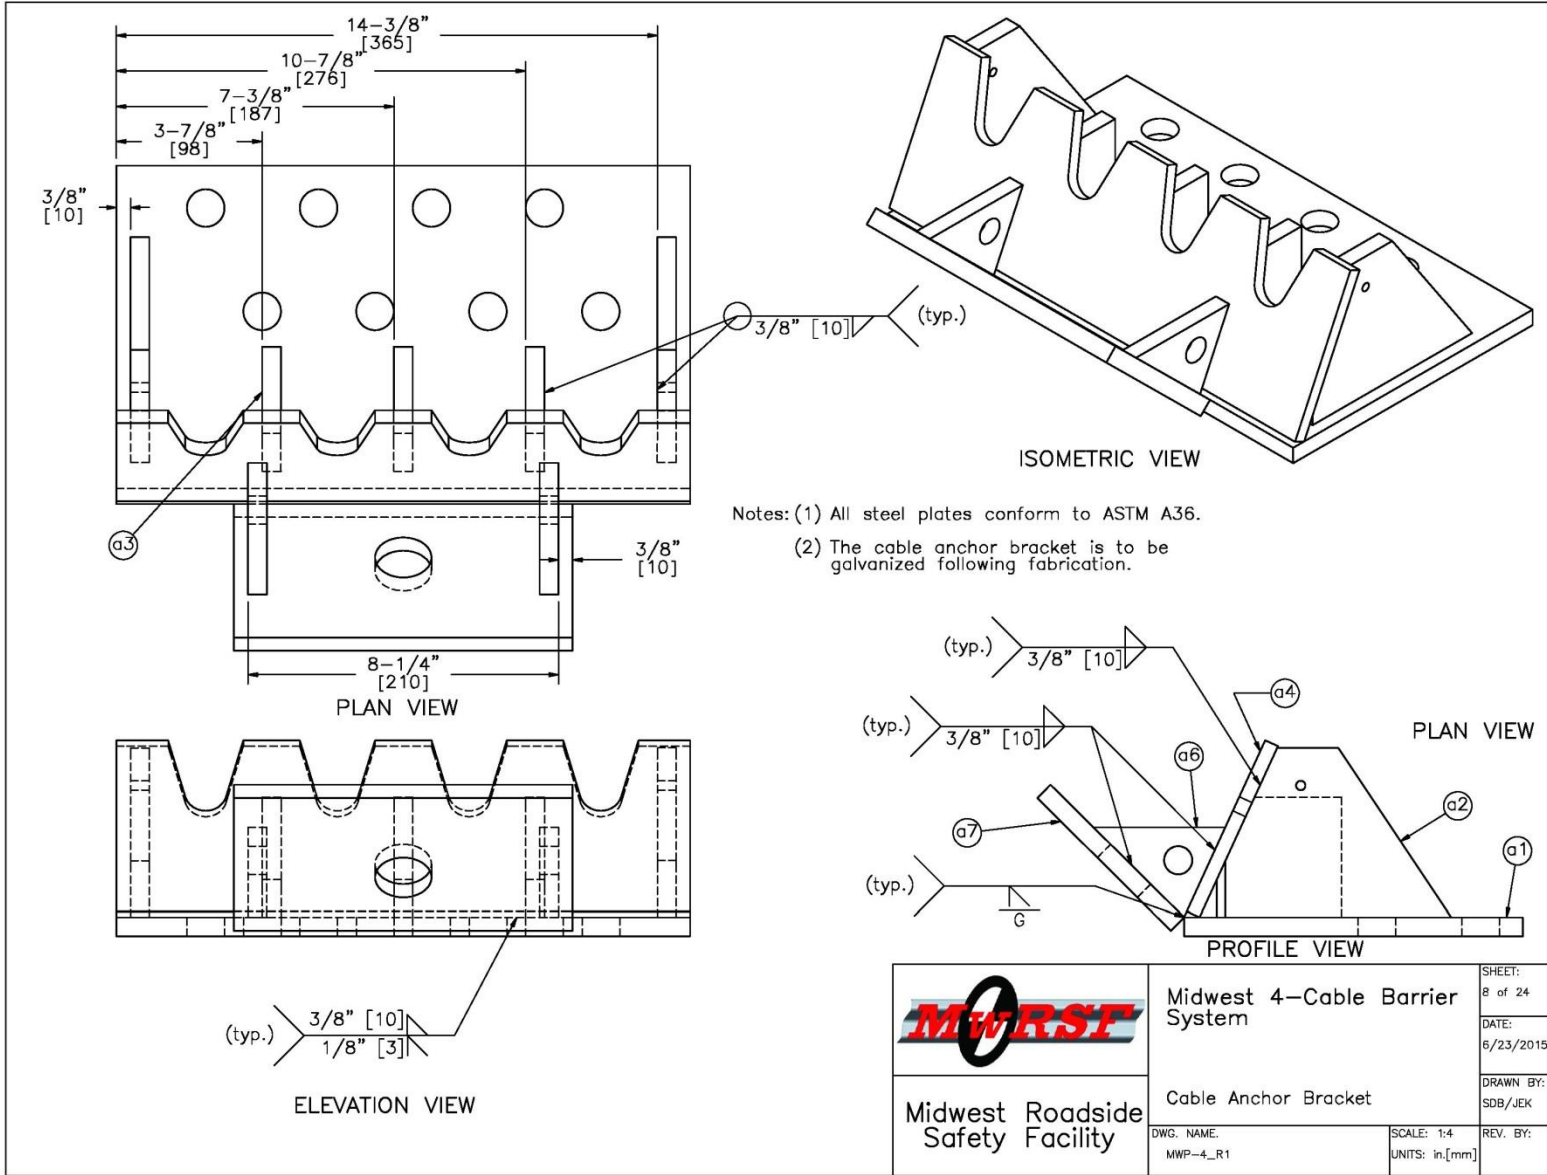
Cable Anchor Bracket, Test No. MWP-4
